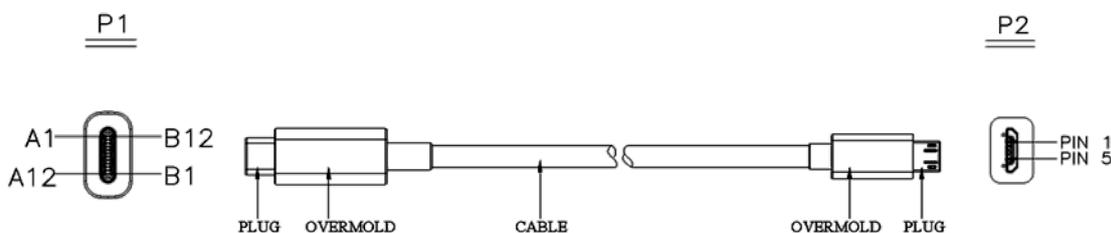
USB Type-C to *USB 2.0* Micro-B Cable Assembly
